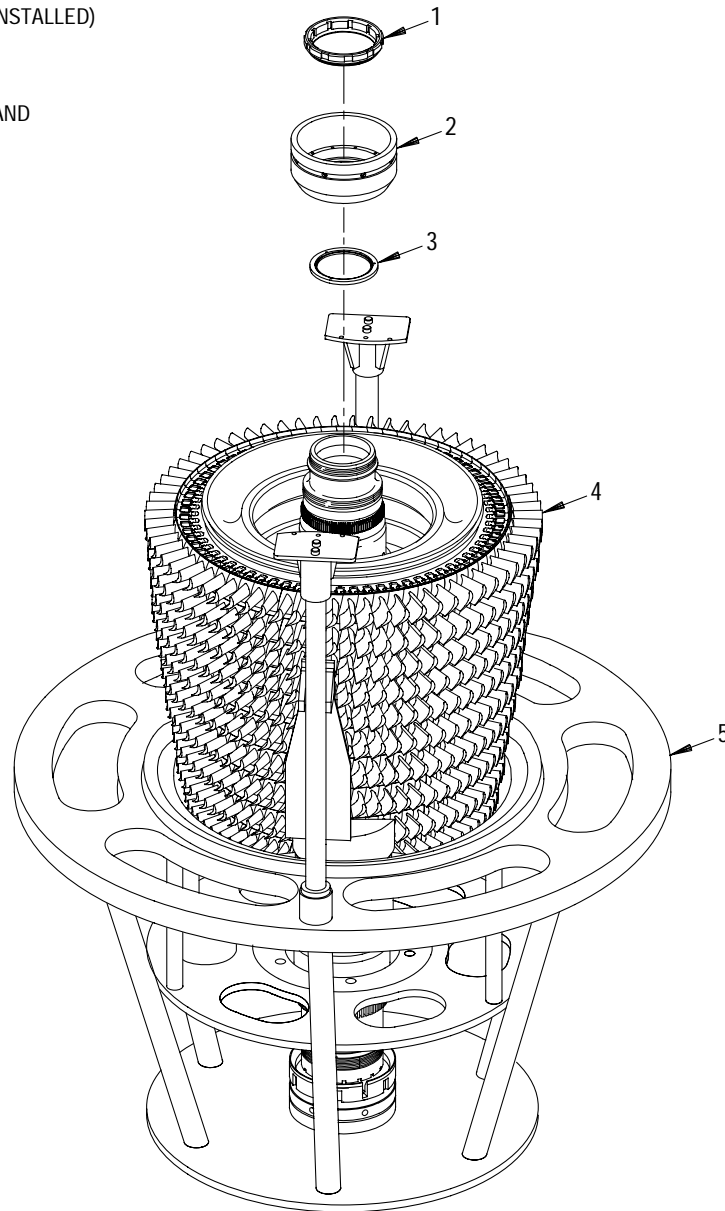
Rear Compressor Rotor Assembly Driveshaft Balance Bearing and Spacers - Removal with PWA 53877 Puller
